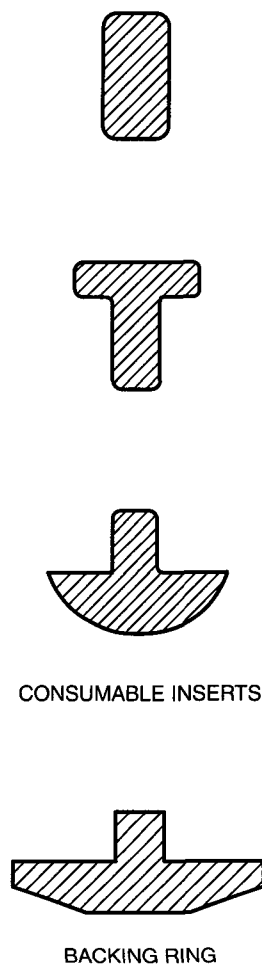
Cross Sectional Views of Typical Consumable Inserts and a Backing Ring
